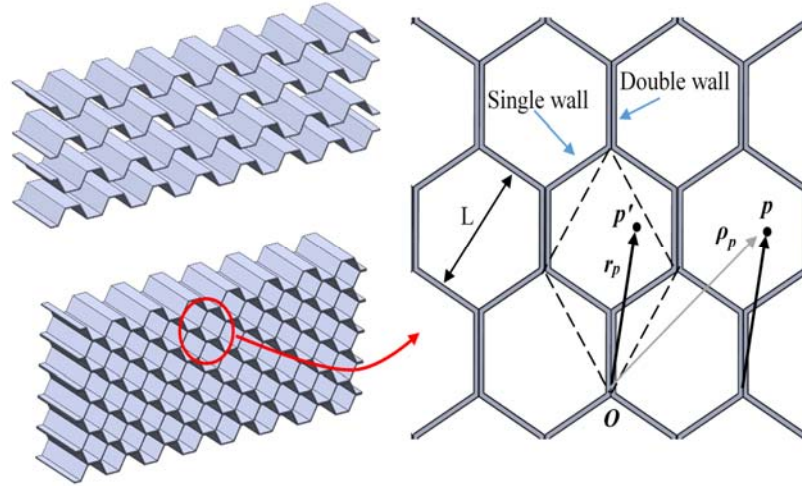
Fabrication of honeycombs by bonding of corrugated aluminum sheets, showing: the corrugated sheets (top left), 3D view of the resulting honeycomb (bottom left), and a two dimensional view of the resulting honeycomb (right). The latter shows that each cell has cell walls with twice the thickness of the sheet. Dashed lines in the right figure are the borders of the representative unit cell for this honeycomb.
